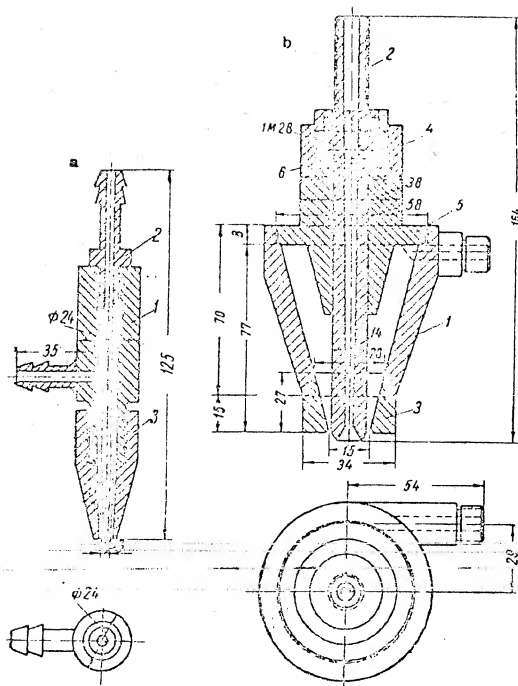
Pneumatic nozzles with external piping. a, with radial compressed-air intake; b, with tangential compressed-air intake; 1, casing; 2, insert; 3, tip; 4, attaching screw; 5, cover; 6, gasket.
